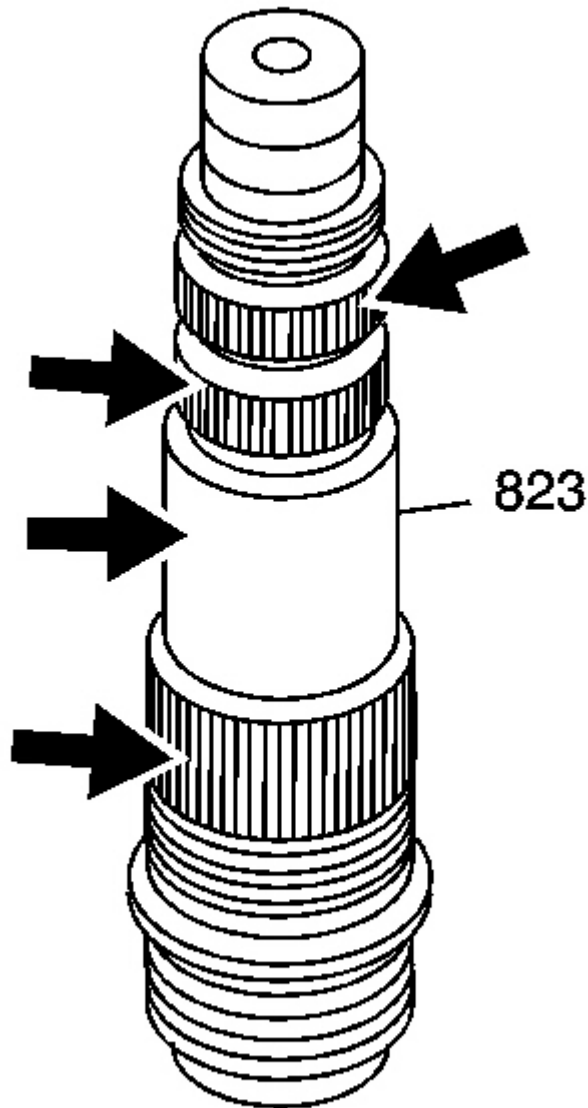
Inspecting The Gears & Bearings For Damage
